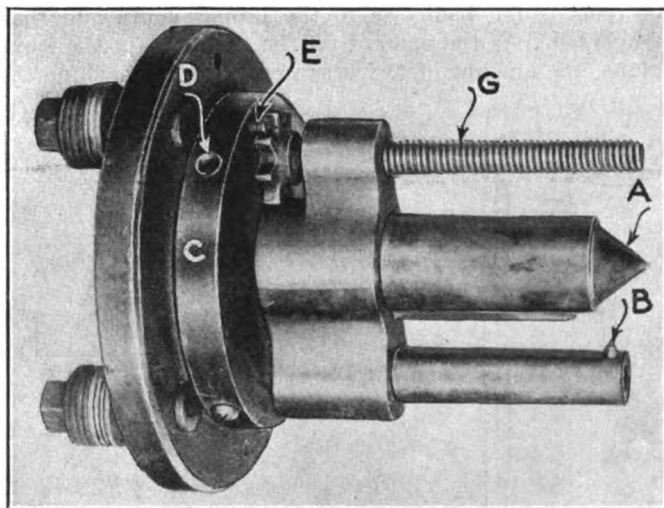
DEVICE FOR TURNING LIFT-SHAFT JOURNALS
